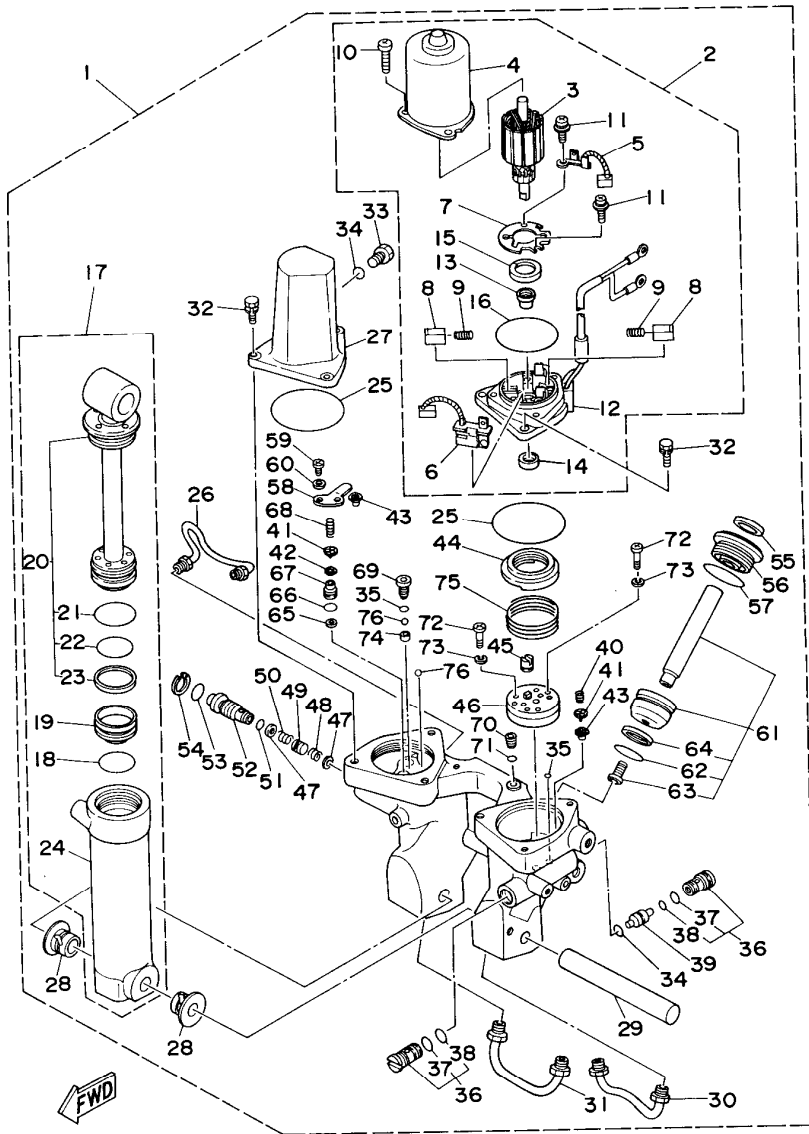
POWER TRIM & TILT ASSY 2 (LONG)
